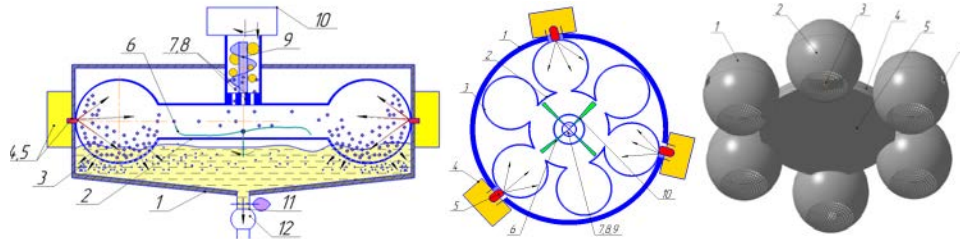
Installation for fat melting; 1: cylinder-shaped shielding enclosure with a conical bottom; 2: cylindrical part of the resonator chamber; 3: spherical part of the resonator chamber; 4: MW generator unit; 5: magnetron radiator; 6: teflon vane feeder with electric motor (dissector); 7, 8: grinding mechanism; 9: discharge auger; 10: receiver tank; 11: branch pipe with a valve; 12: pump for discharging a molten fat mass
